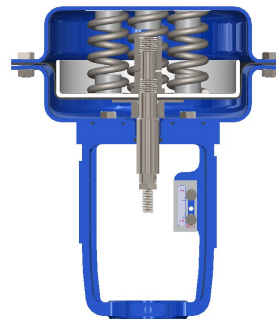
Cross Sectional Drawing AO-3600 Diaphragm Actuator (Direct Acting)
